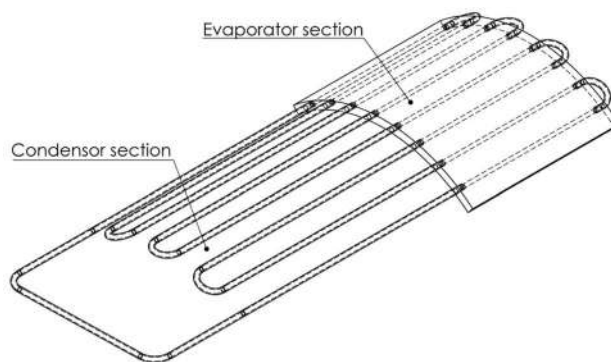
Closed-loop pulsating heat pipe embedded with cooling pad
